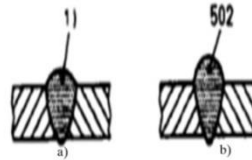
Appearance of normal a) and excessive weld metal
